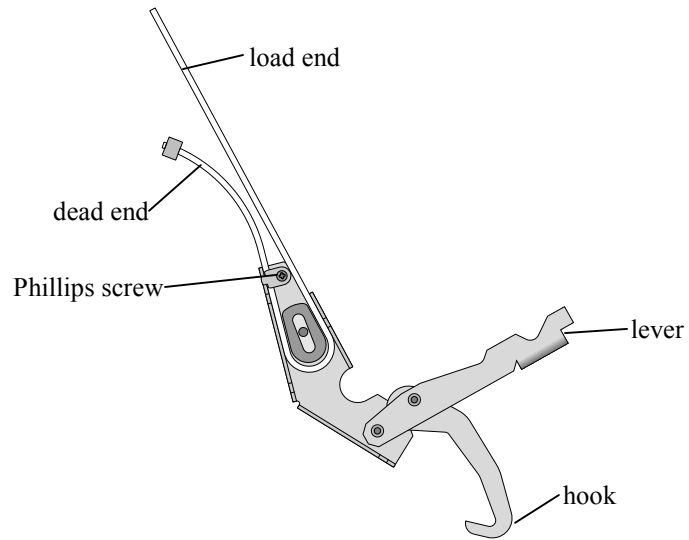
Mechanical Drawing of Guy Hook and Case
